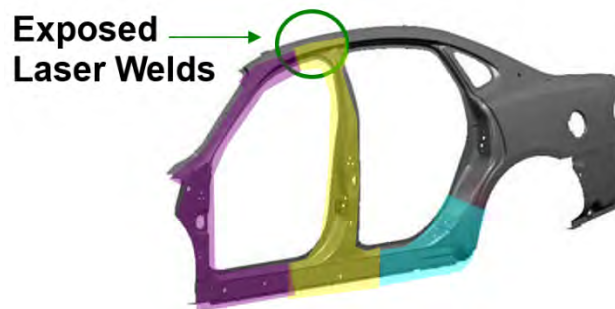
E-1: Future body-side outer with exposed laser welds and multi-piece construction.^{A-17}
